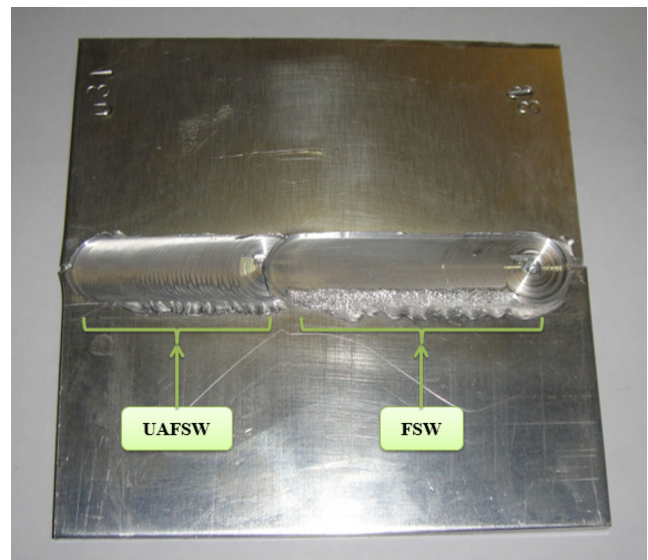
Welded workpiece by FSW and UAFSW with a rotary speed of 1,000 rpm and a feed speed of 64 mm/min
